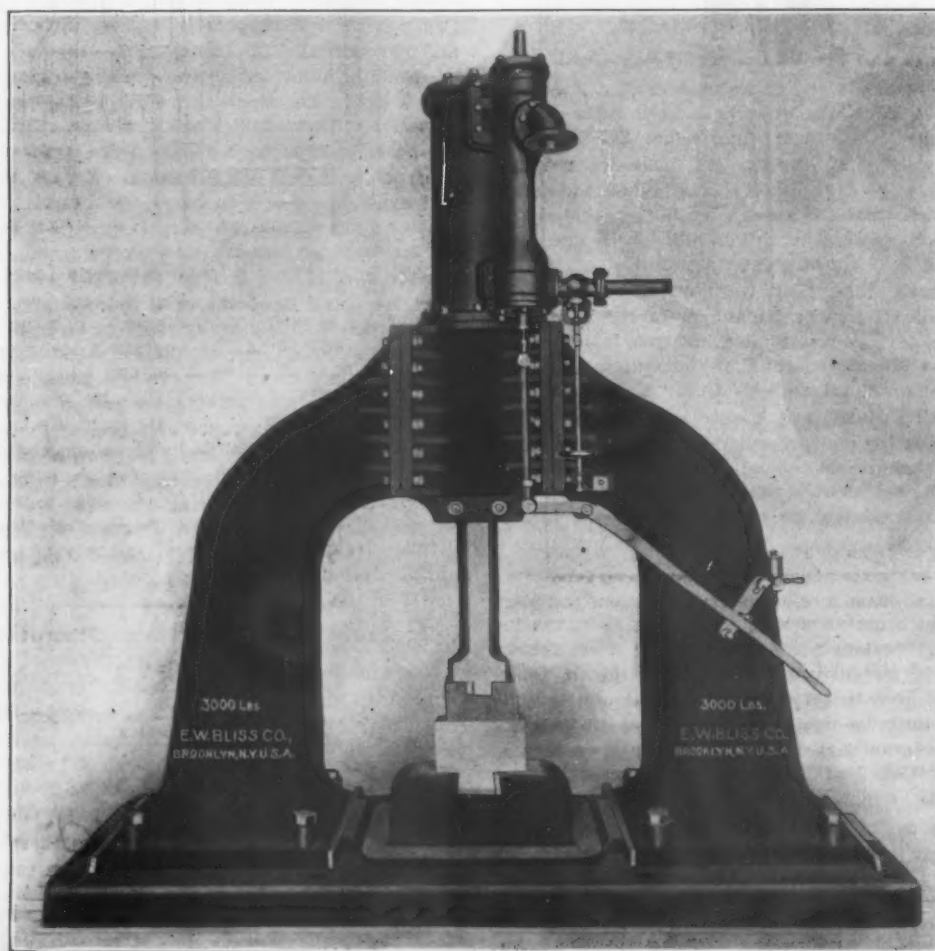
A 3000-Lb. Compound Pneumatic Forging Hammer Built by the E. W. Bliss Company, Brooklyn, N. Y.
